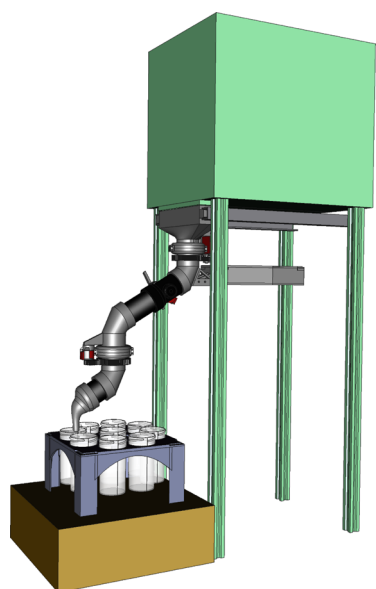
3D view of the design for the pellet distributor, mounted on an schematic clone of the pelletizer and filling a tray with several cups.
